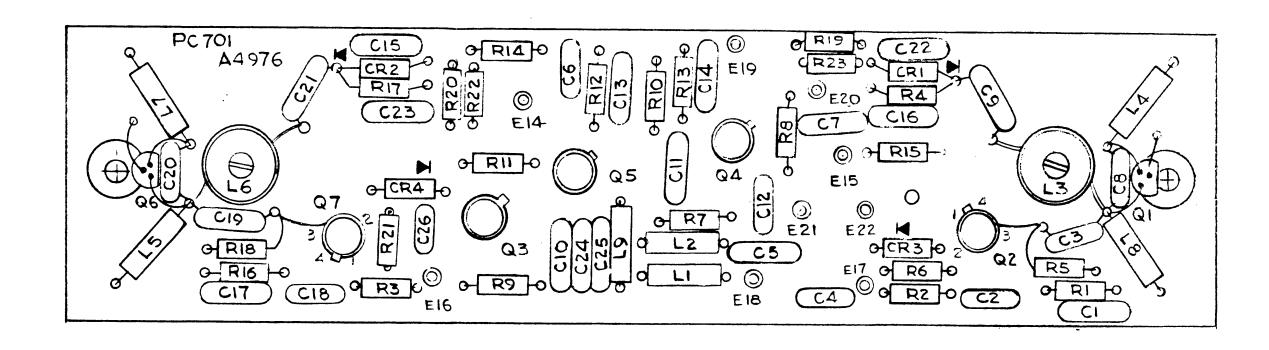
163.5-192.5 MHz Oscillator Assembly Z304, Location of Components
